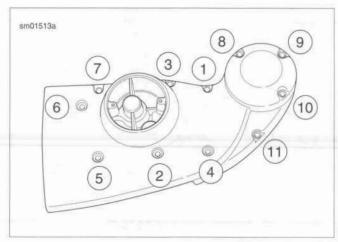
Gearcase Cover Mounting Screw Torque Sequence
